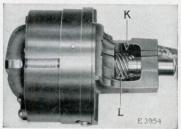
View of Motor, Showing Lubricant Well and Spiral Driving Pinion
